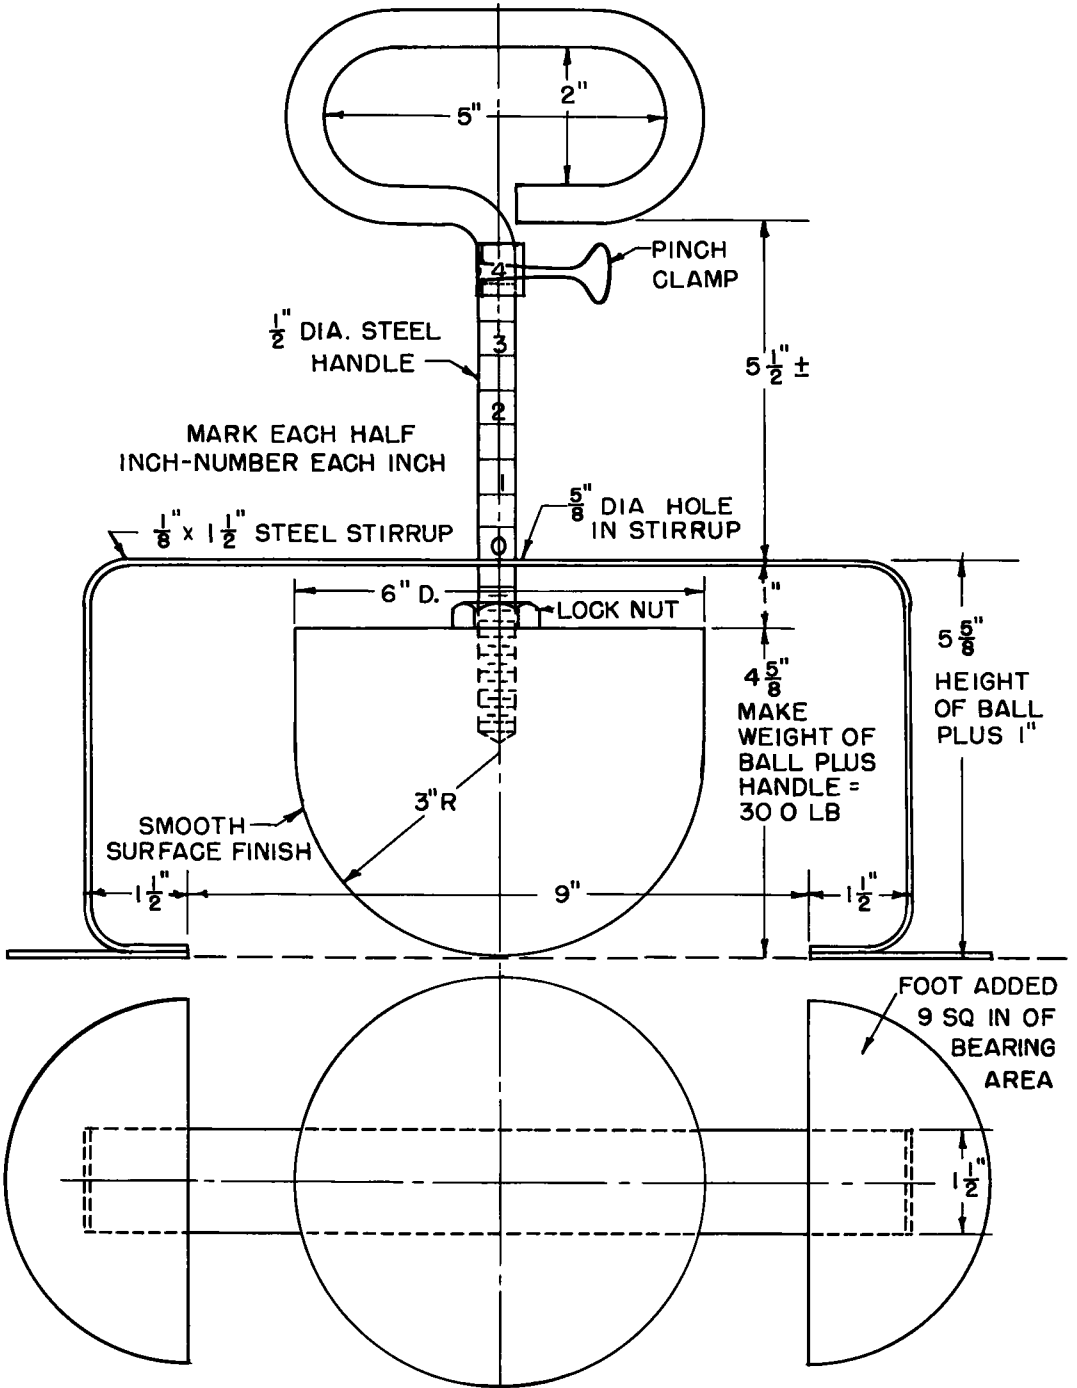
Ball-penetration apparatus for consistency of concrete Bureau of Public Roads modification.
